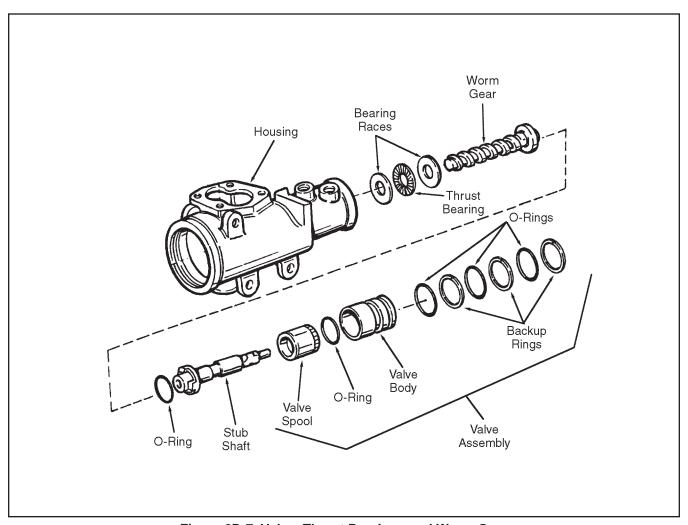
D-7. Valve, Thrust Bearings and Worm Gear
